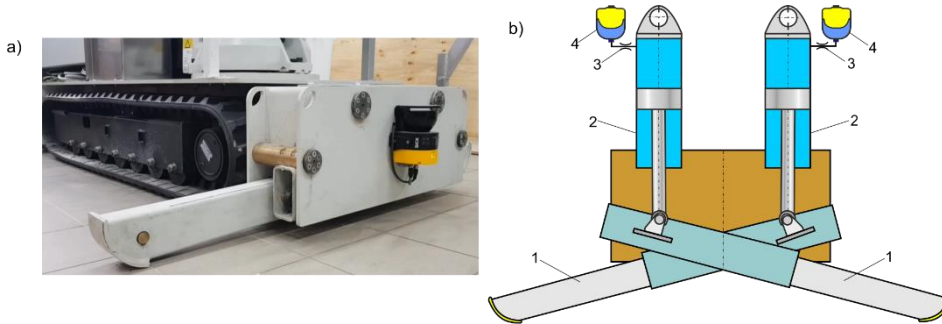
Hydraulic lifting system of bricklaying robot: a) view of the extendable support leg in the front hydraulic lifting system, b) functional drawing of the hydraulic lifting system: 1 – support legs, 2 – hydraulic lifting cylinders, 3 – damping elements, 4 – hydropneumatic accumulators.
